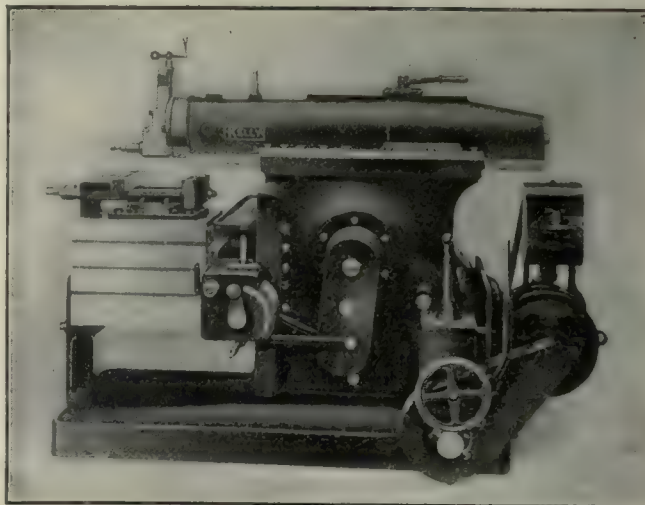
KELLY 20-IN. BACK-GEARED CRANK SHAPER WITH GEARED MOTOR DRIVE
